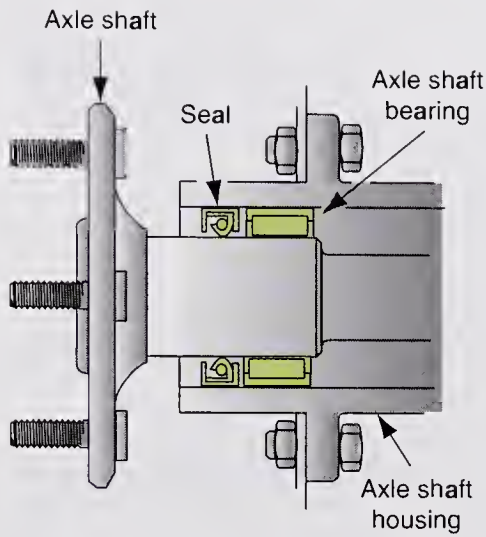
Rear axle roller bearing and seal, rear-wheel-drive car.
